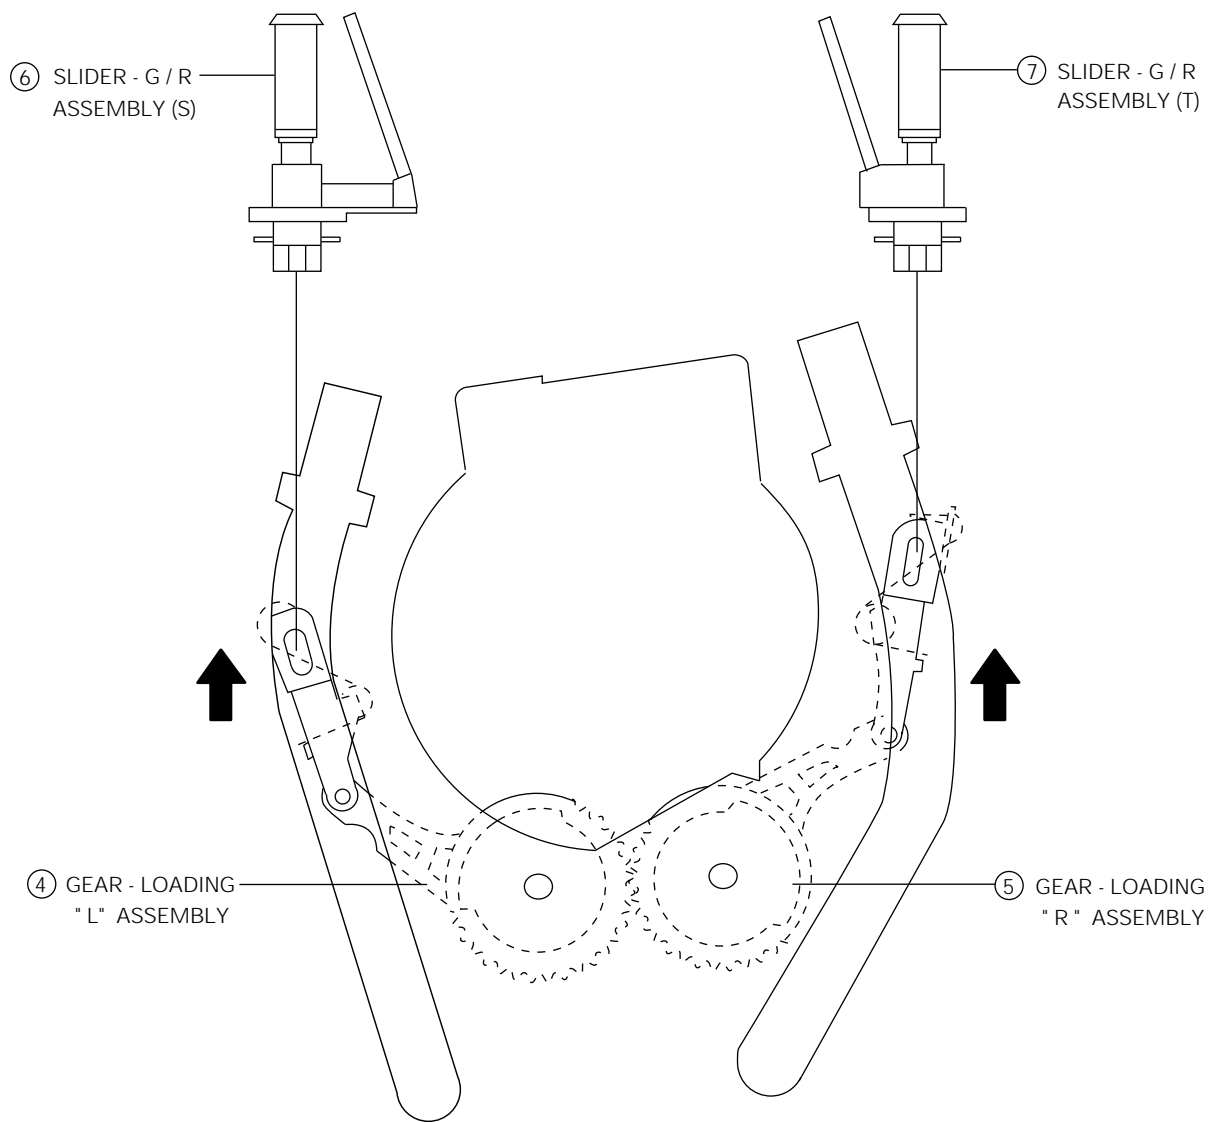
Assembly of Slide Guide Roller "S", "T" Ass'y
